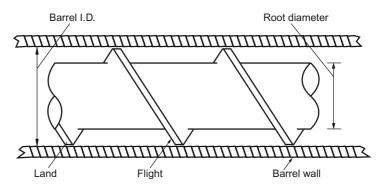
Cross-section of a screw in the barrel of an injection-molding machine
